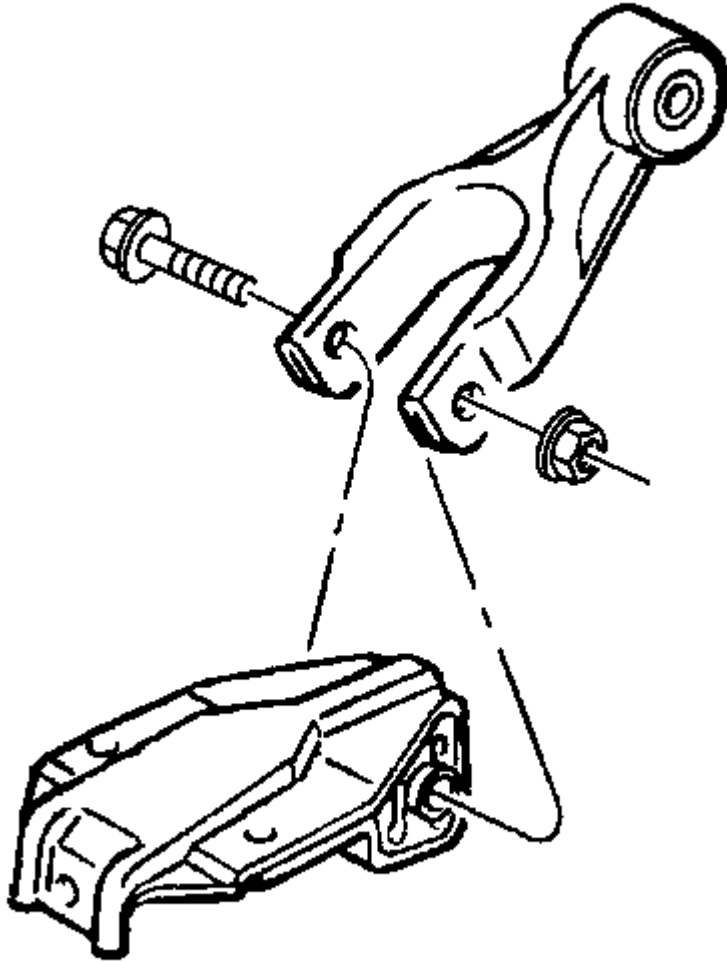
Engine Mount Strut, Bracket & Bolts - Right
